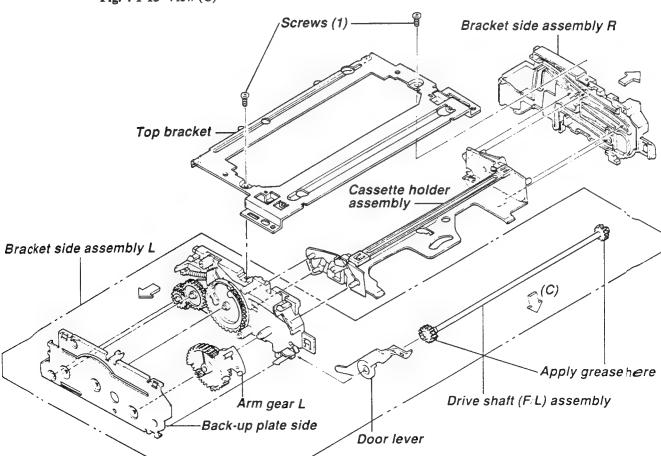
Drive shaft (F/L) assembly replacement
